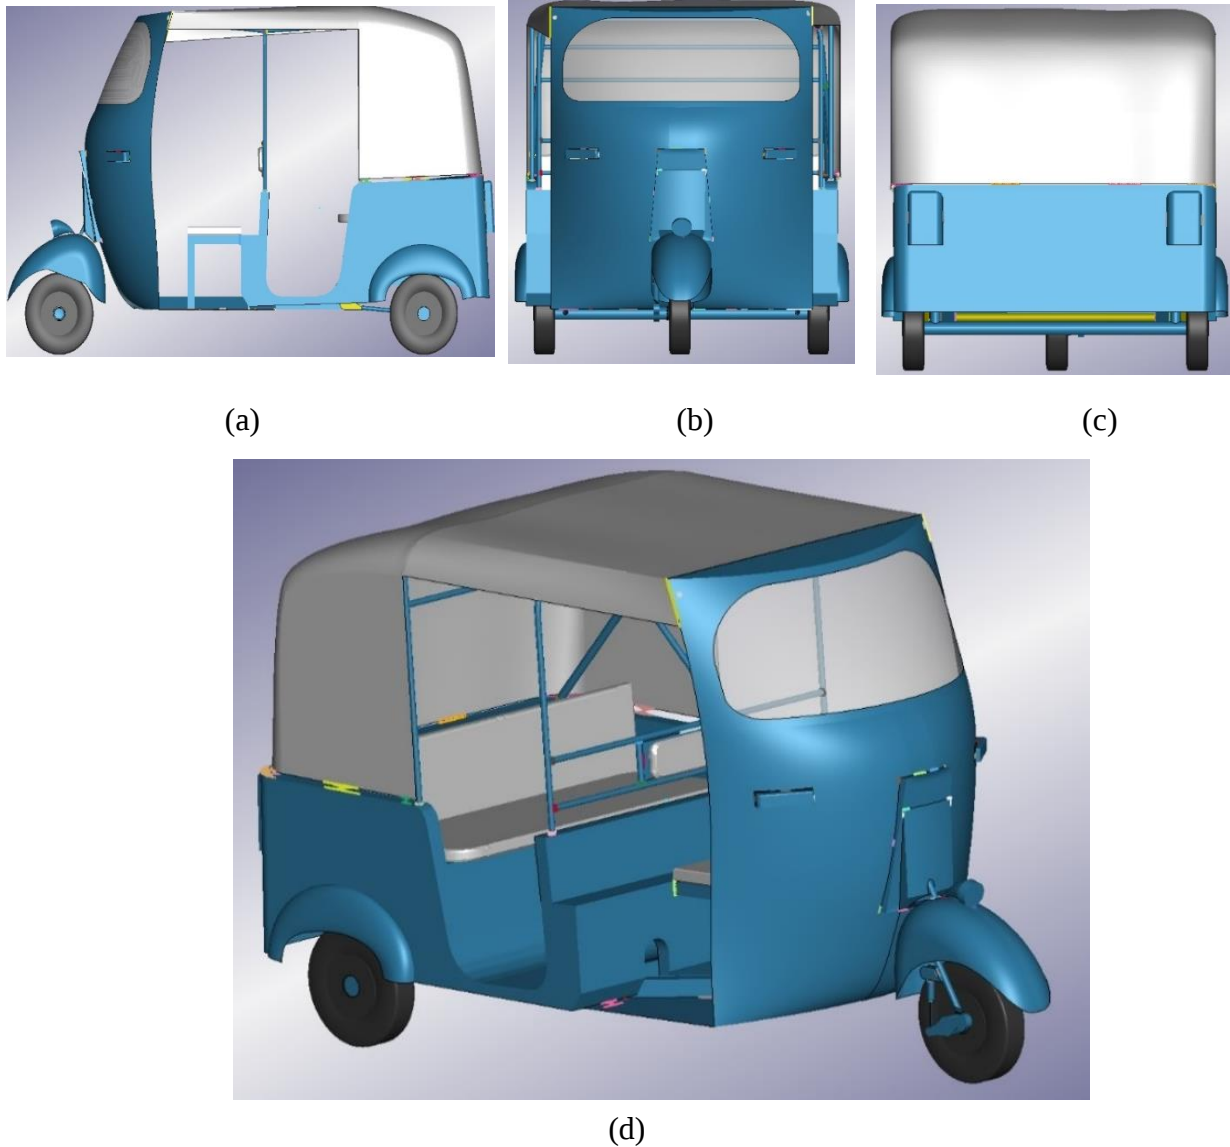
Auto rickshaw model; (a) side view; (b) front view. (c) Rear view; (d) 3D view
